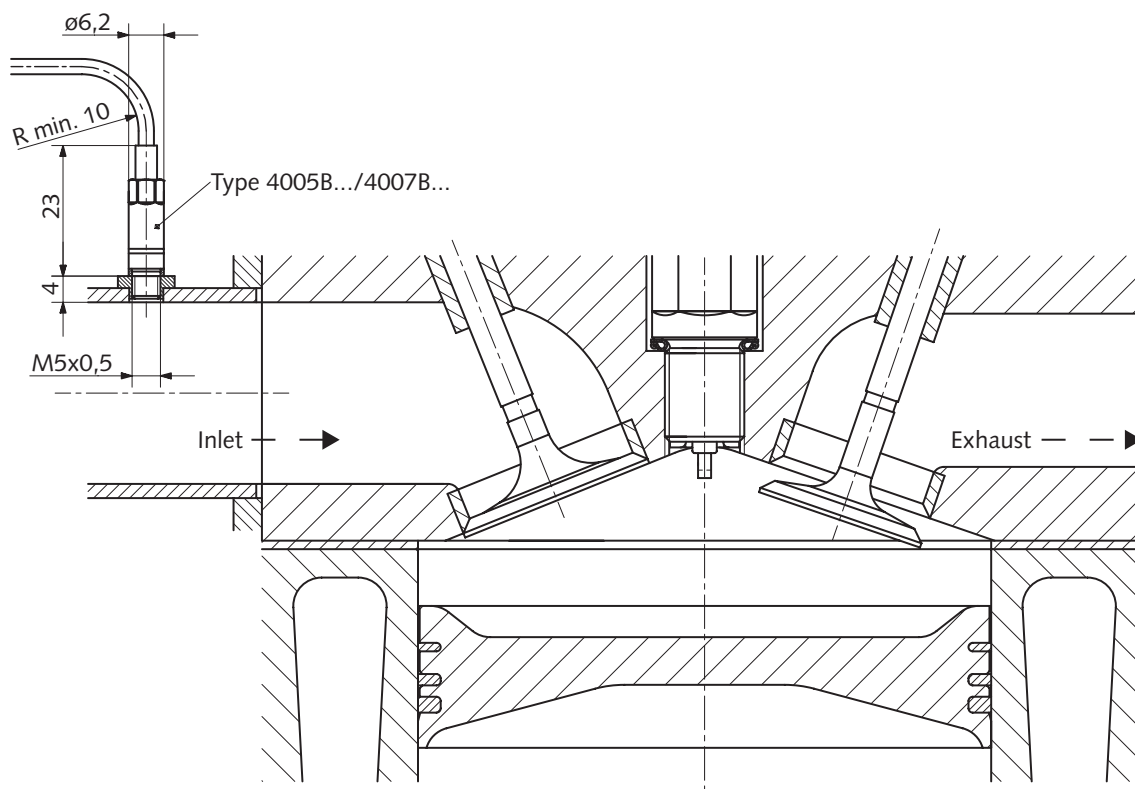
Direct mounting of sensor Type 4005B.../4007B... in the intake manifold of an internal combustion engine
